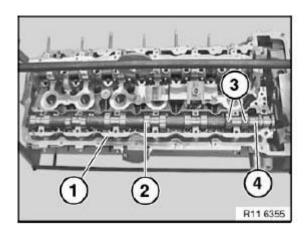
Identifying Lower Bearing Strip With Exhaust Camshaft And Cams Courtesy of BMW OF NORTH AMERICA, INC.
